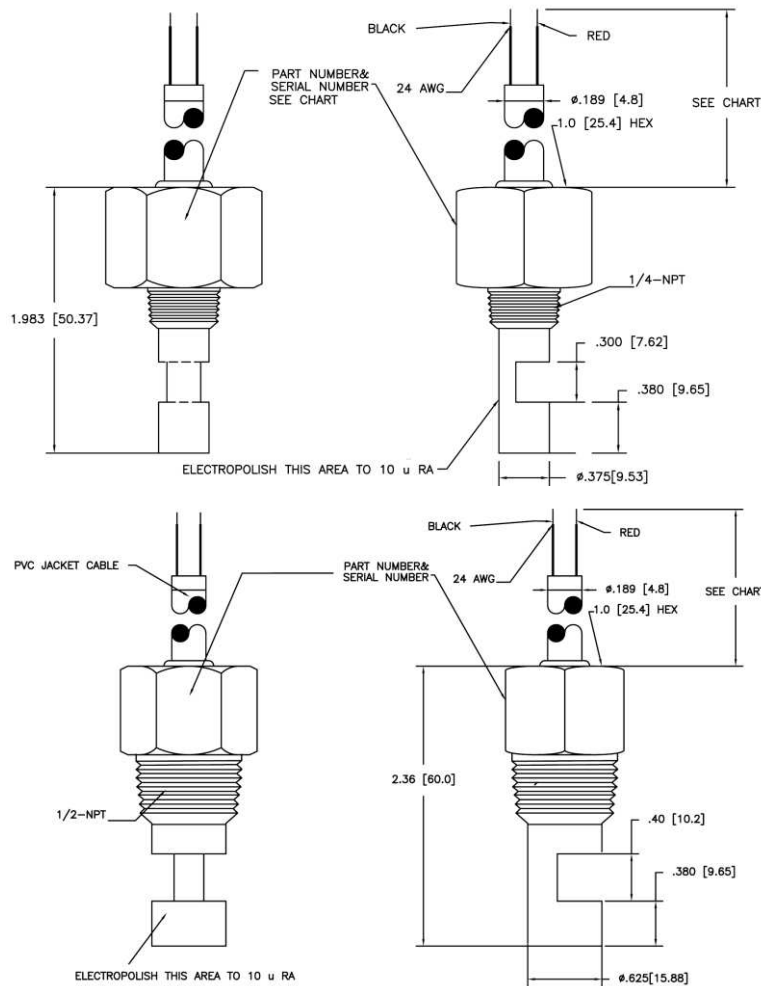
Top - LL-01 series element with 1/4" NPT sensor mounting
